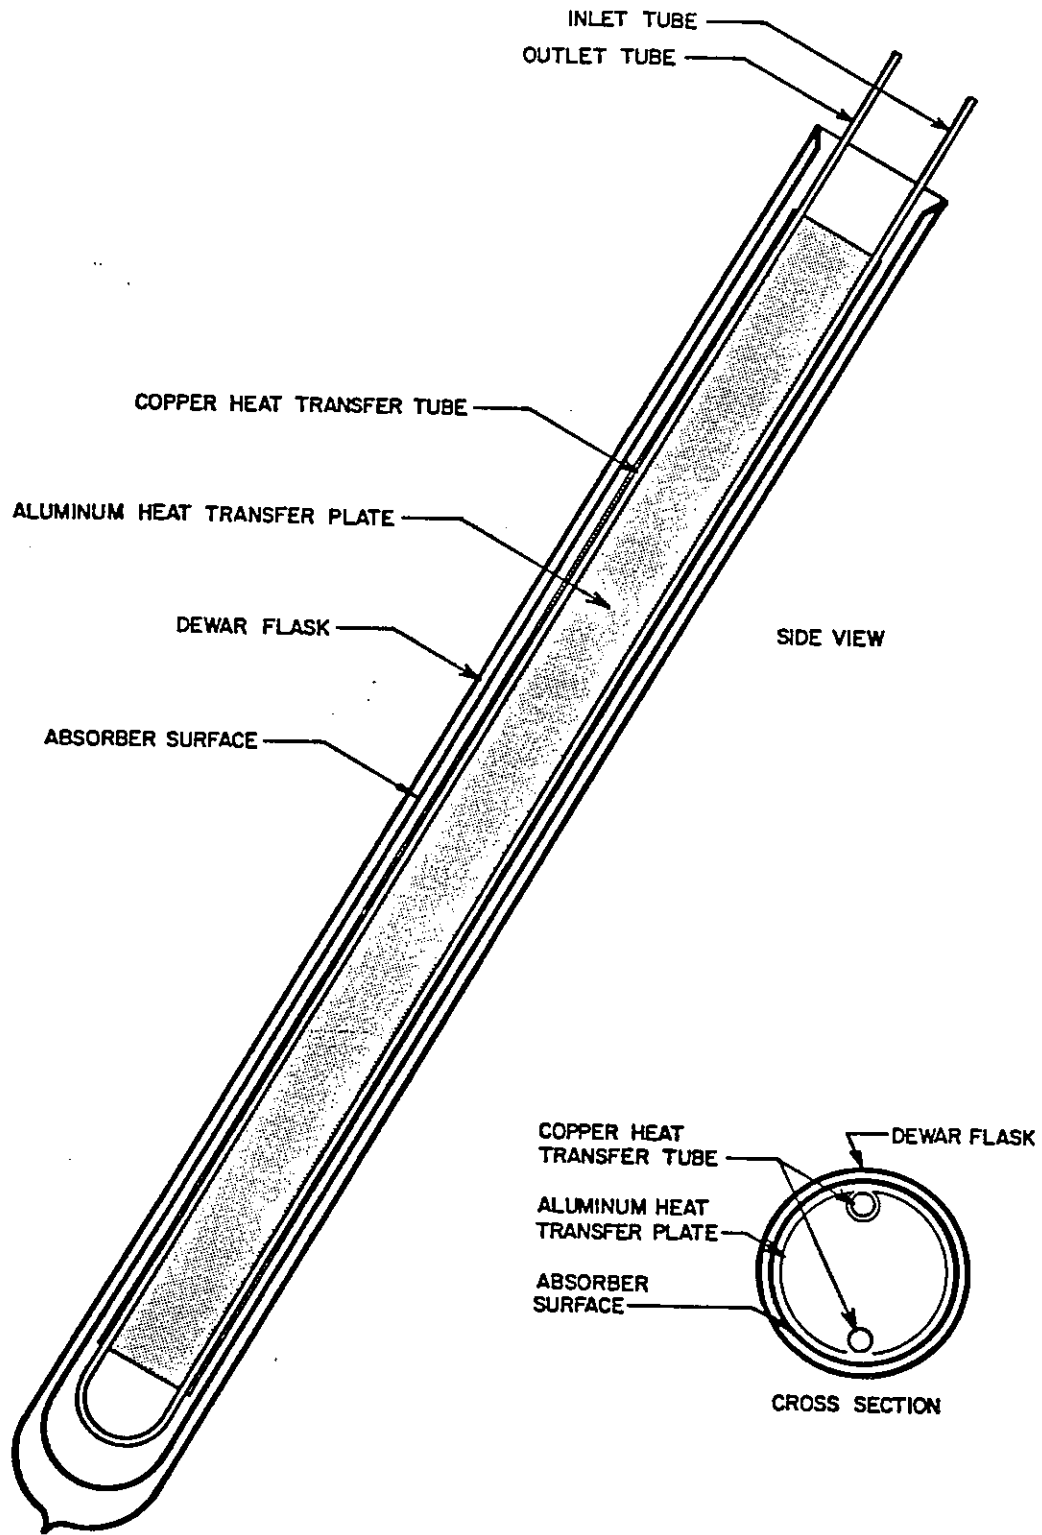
Dewar Tube Type -- U-Tube with Fin Heat Extraction
